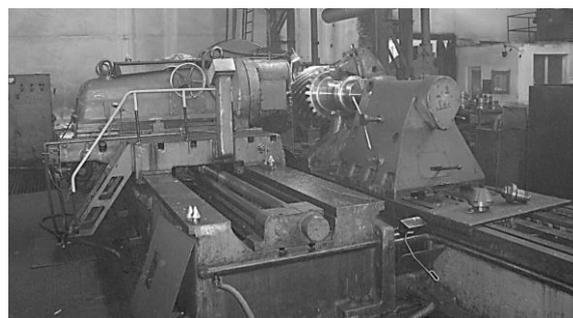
Hobbing machine. Source: (Zamet Industry)
